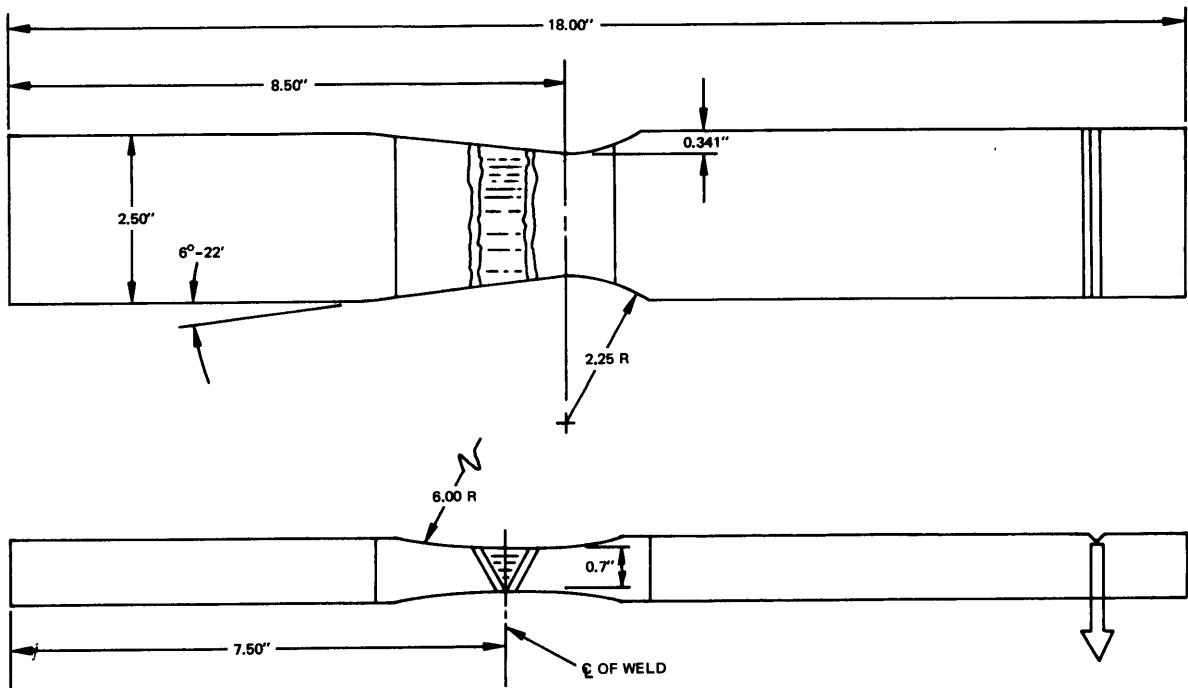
Tapered Welded Low-Cycle Fatigue Specimen
